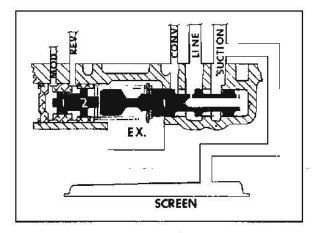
Main Pressure Regulator Valve - At Idle
